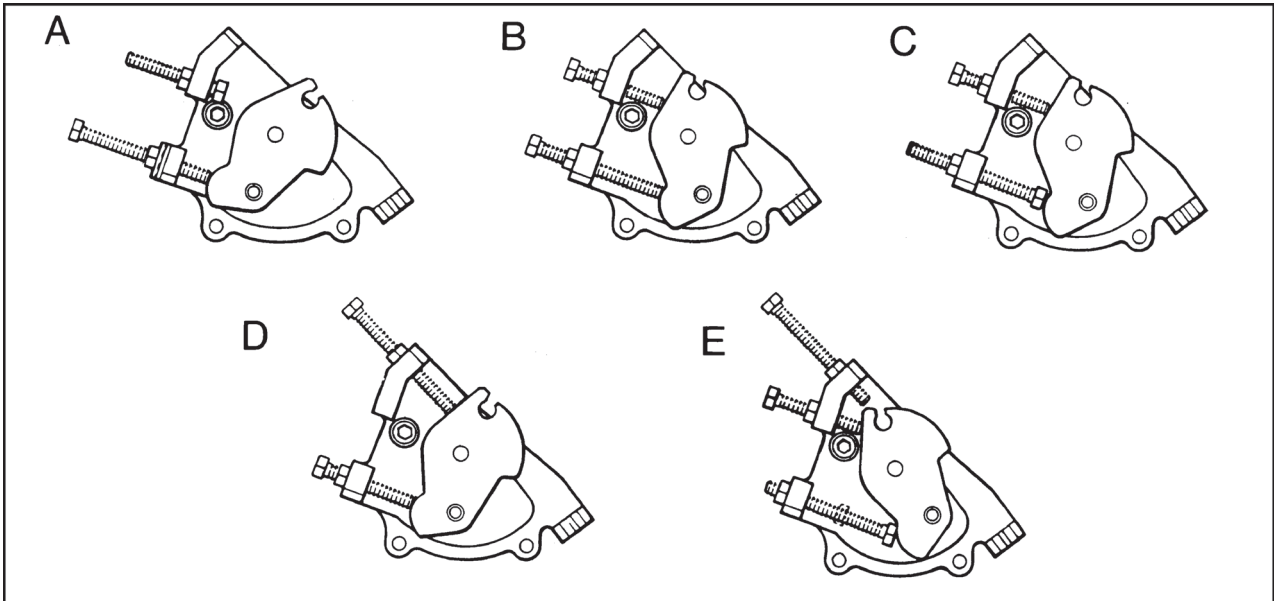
Speed Adjustment Setscrews; MA - Tamperproof screw
